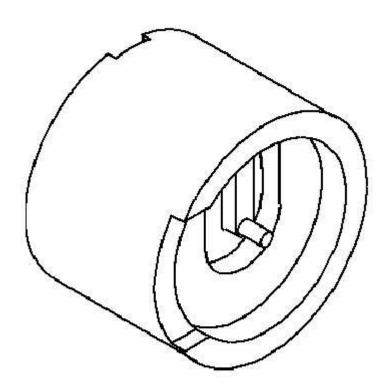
Timing Chain Tensioner Resetting Gauge 8186 Courtesy of CHRYSLER LLC
